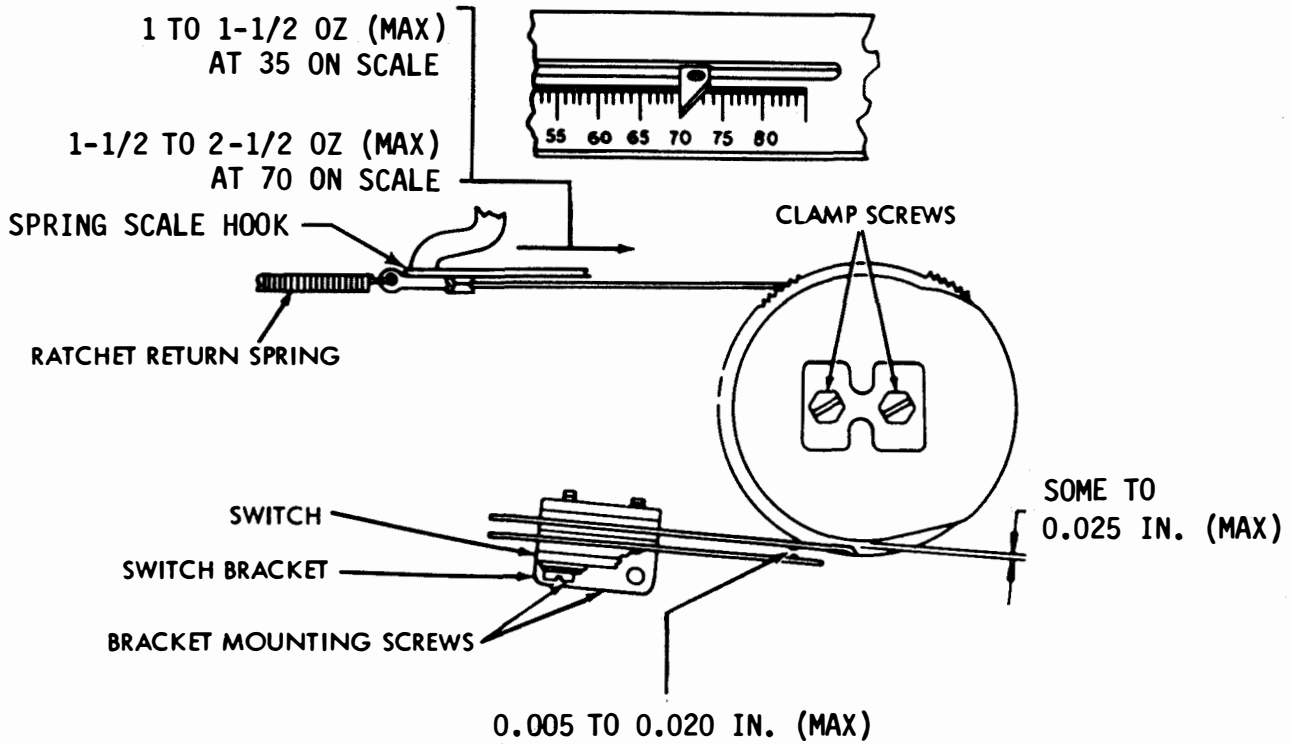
Ratchet Drum Assembly Return Spring and Character Counter End-of-Line Switch
